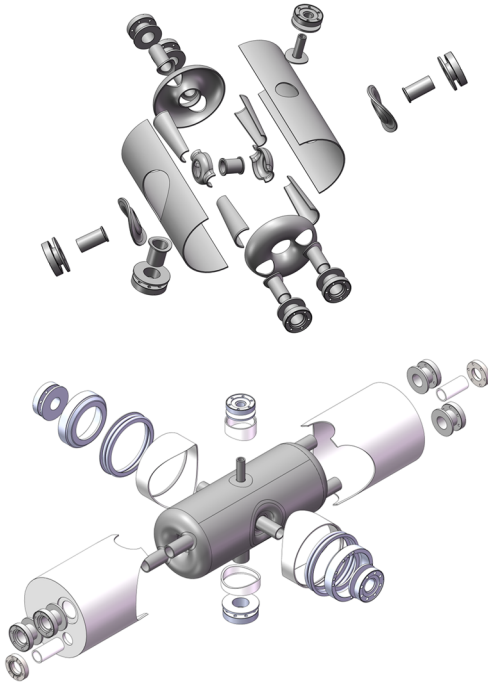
Exploded view of HWR1 cavity (up) and its helium jacket (down).
